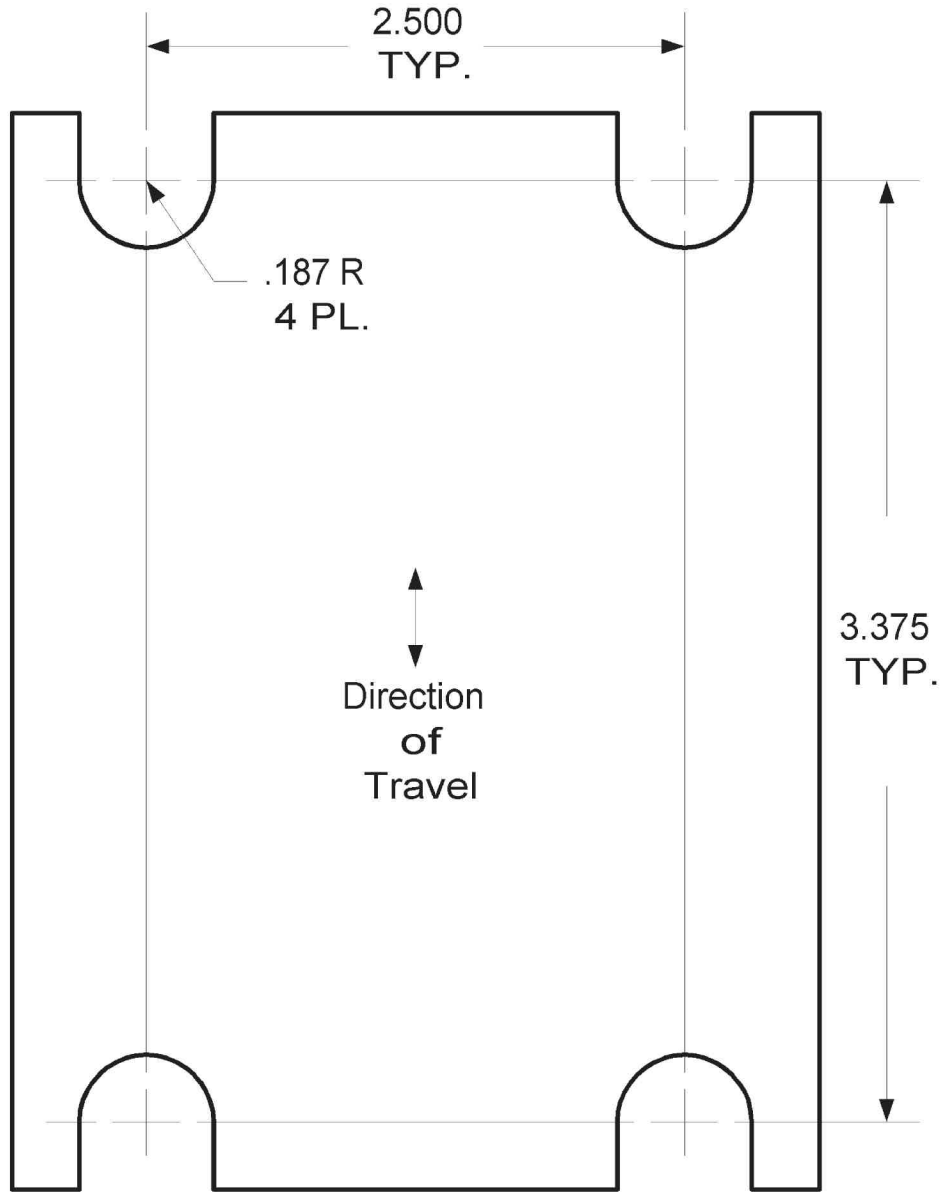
AVC-5 STANDARD DRIVE ASSEMBLY MOUNTING DIMENSIONS
